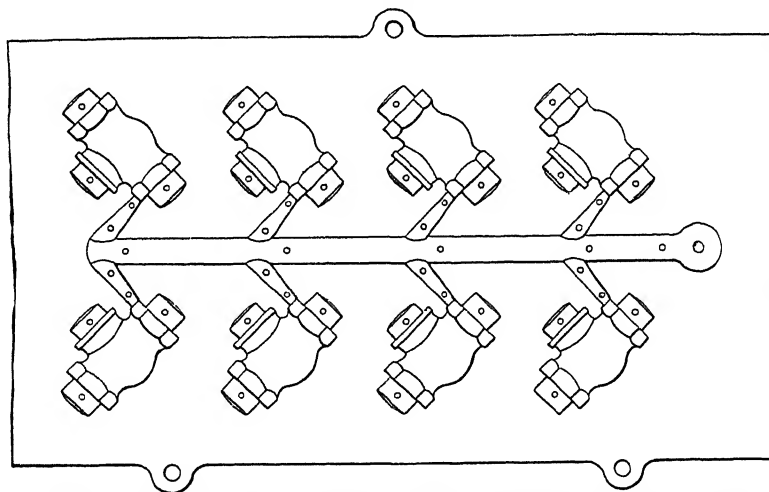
Cock Body Patterns of Metal with Ingate and Runners mounted on Iron Plate
